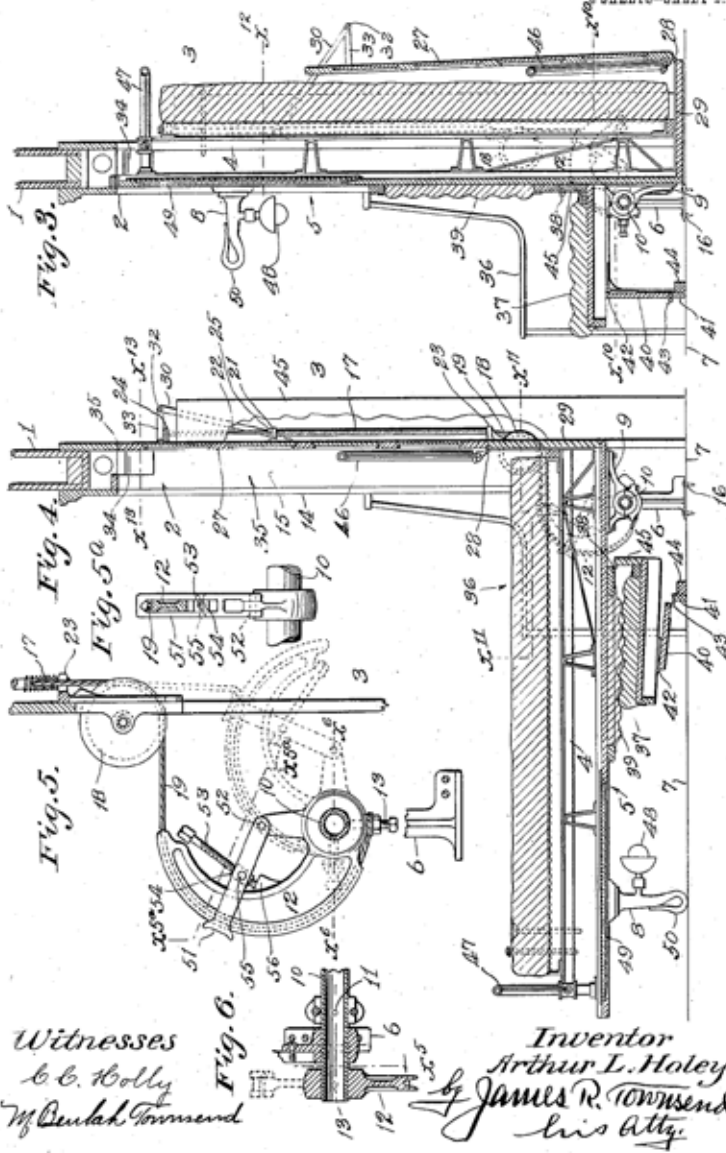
An illustration in one of Haley's patents for Sanitary Concealed Metal Beds identifies the mechanisms that enabled the bed to be unfolded open and folded closed. Arthur Haley, 1910. Wall Seat Wall Bed. U.S. Patent 956,340, filed June 29, 1907, and issued April 26, 1910.
